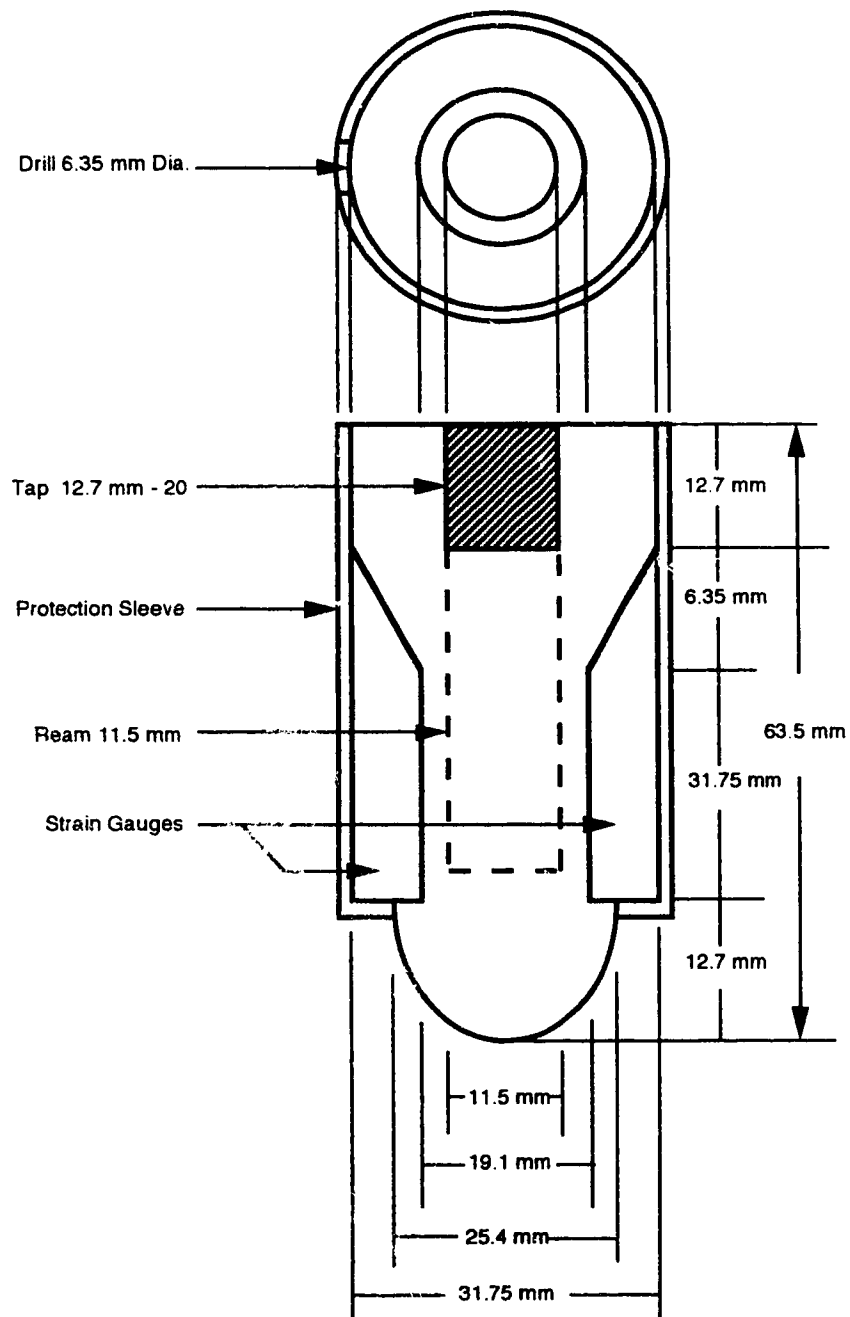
Cross Sectional and Plan View of the Axial Load Cell Compression Transducer
